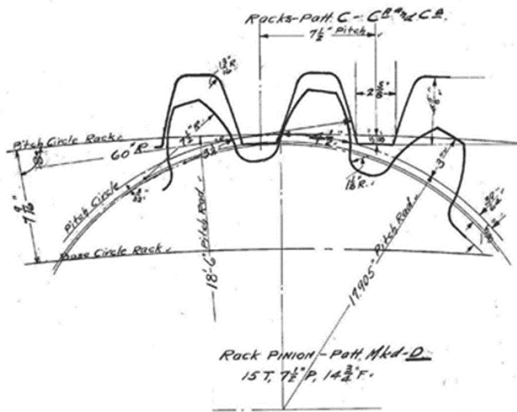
As-designed pinion tooth and rack tooth mesh detail taken from original drawings.
